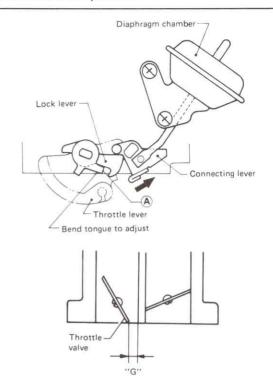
Valve plate interlock setting diagram (Sec 11)
